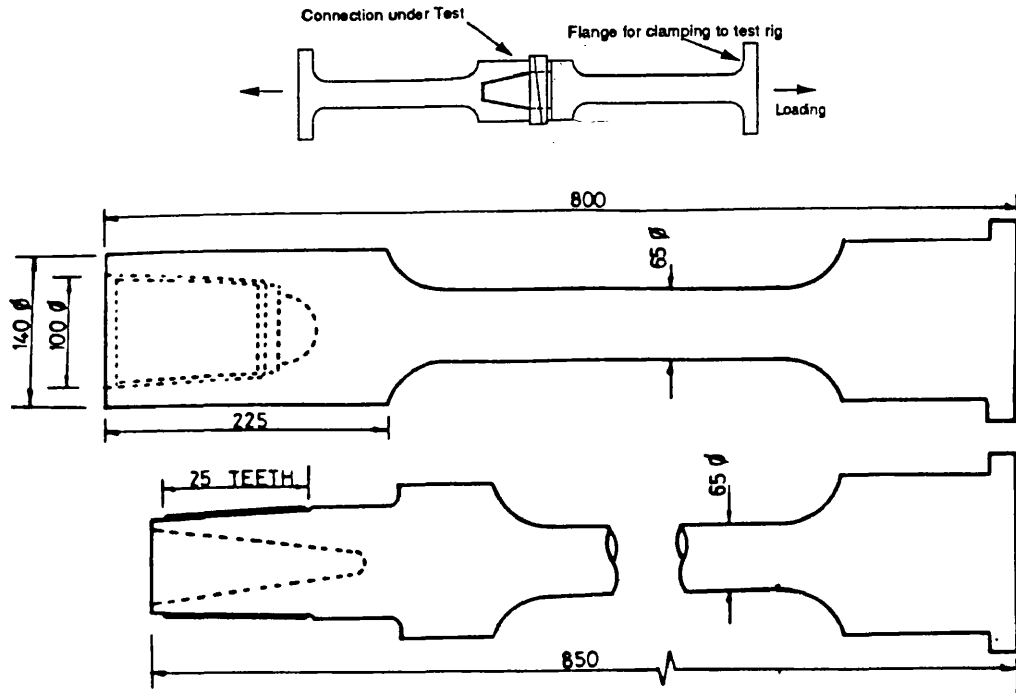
Thick walled specimen and general test arrangement Dimensions in mm.
